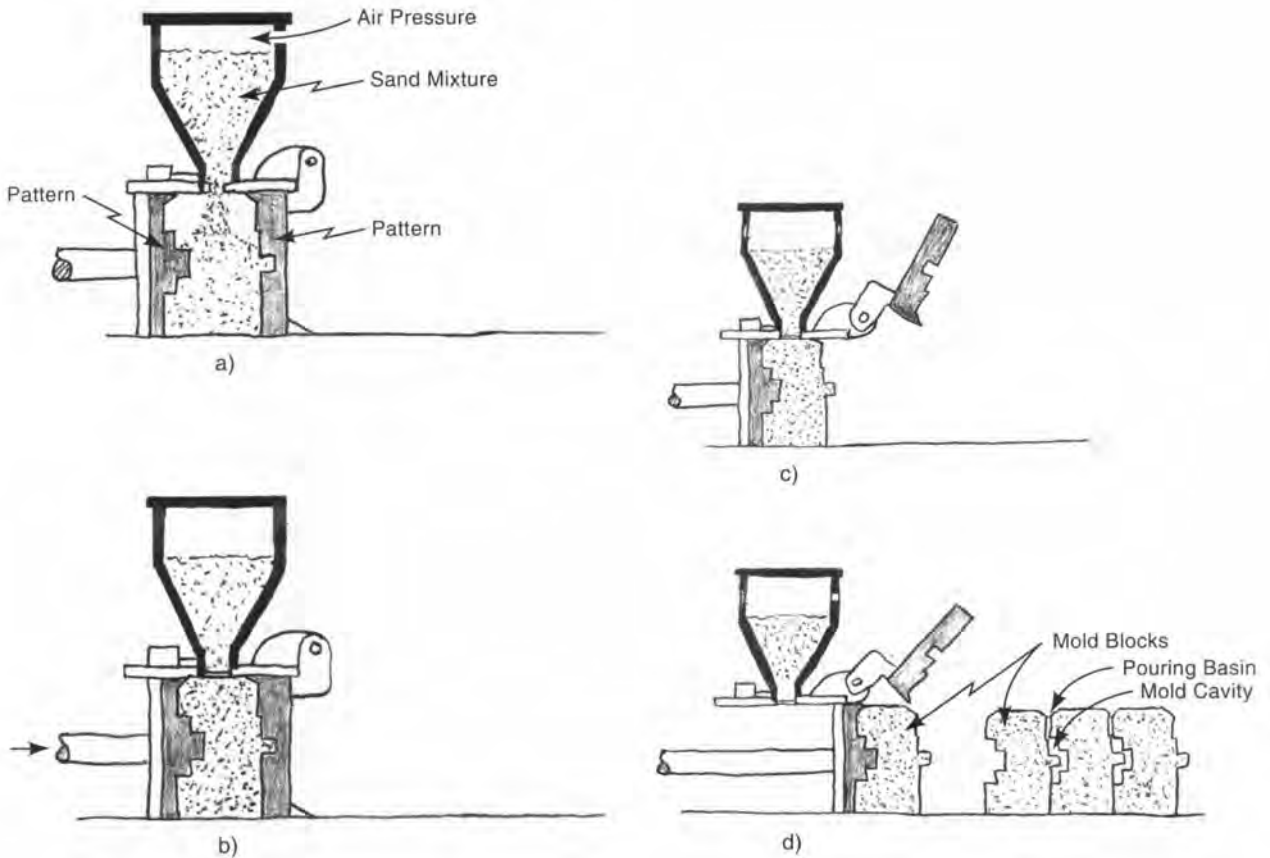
B3g Flaskless molding. a) Sand is blown between two pattern plates in a molding chamber. b) The sand mixture is squeezed to form a dense mold block which has half the mold cavity on each side. c) One of the patterns is withdrawn so that the newly formed mold block can be moved. d) The mold block is pushed tightly against previously made mold blocks. The pouring basin, sprue, and mold cavity lie at the vertical parting line between mold blocks.
